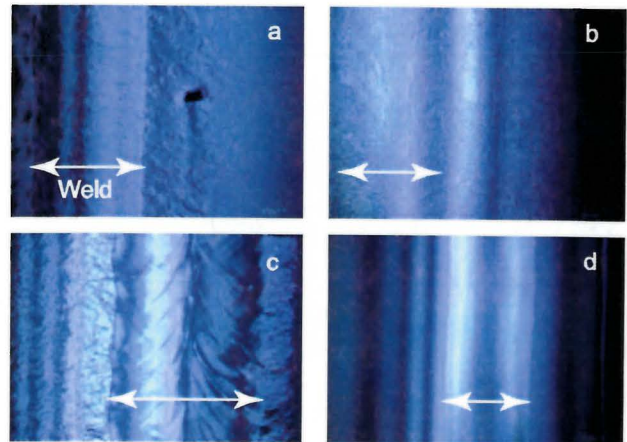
Pictures of weld bead: (a) Electropolished surface near cavity equator weld with a pit; (b) Same region as (a) showing improved polish and removal of pit after step 4 and light EP; (c) Typical high-quality EP polish; (d) Mirror-like finish obtained on a different cavity after step 5 polishing with colloidal silica.
